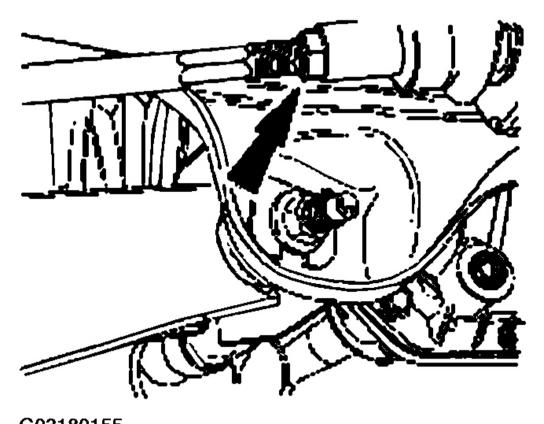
Tightening Nut Courtesy of FORD MOTOR CO.
